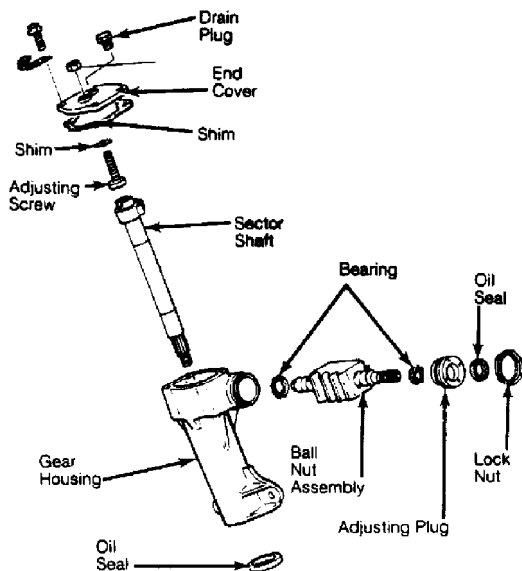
Exploded View of Steering Gear Assembly (B2000 and B2200 Pickups)
